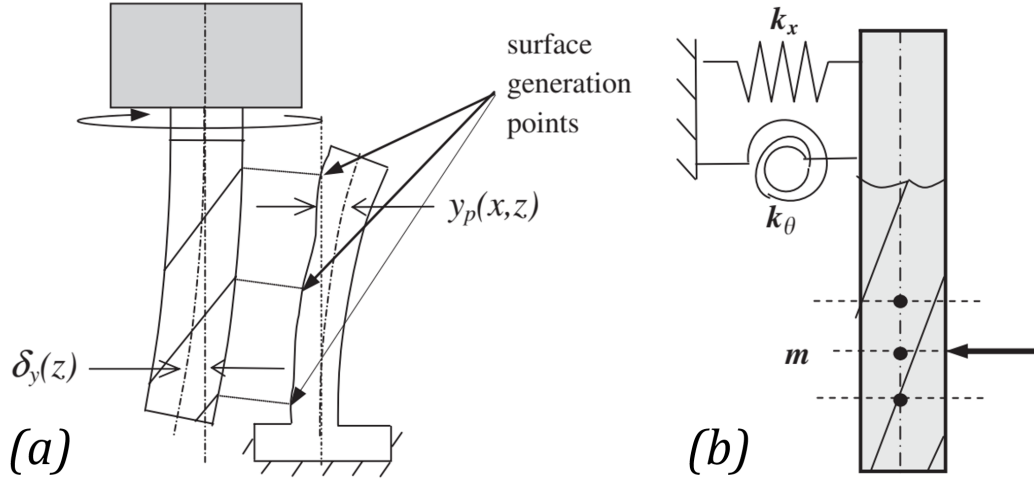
(a) Elastic deformation and imprinted surface in milling, (b) torsional and bending stiffness modeling of an end mill [9]
